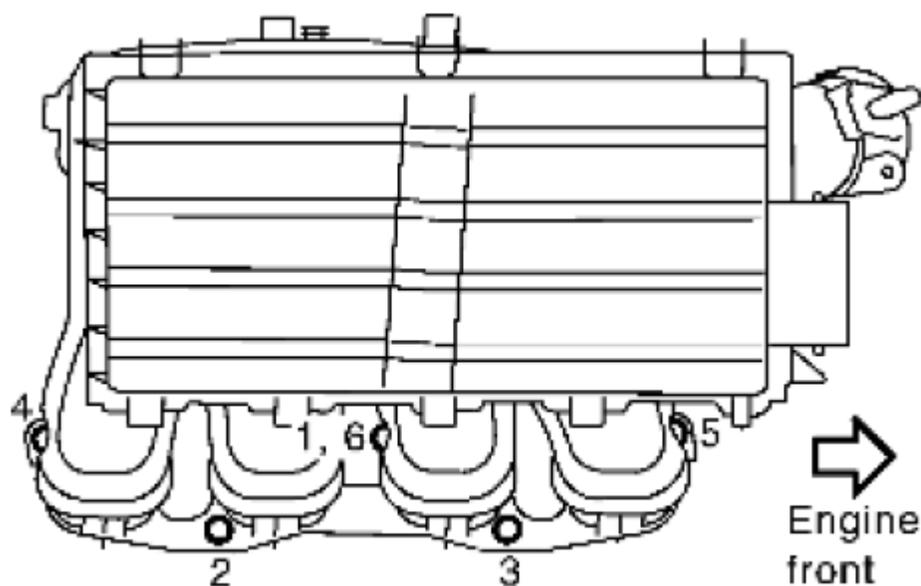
Tightening Order Of Intake Manifold Nuts And Bolts
